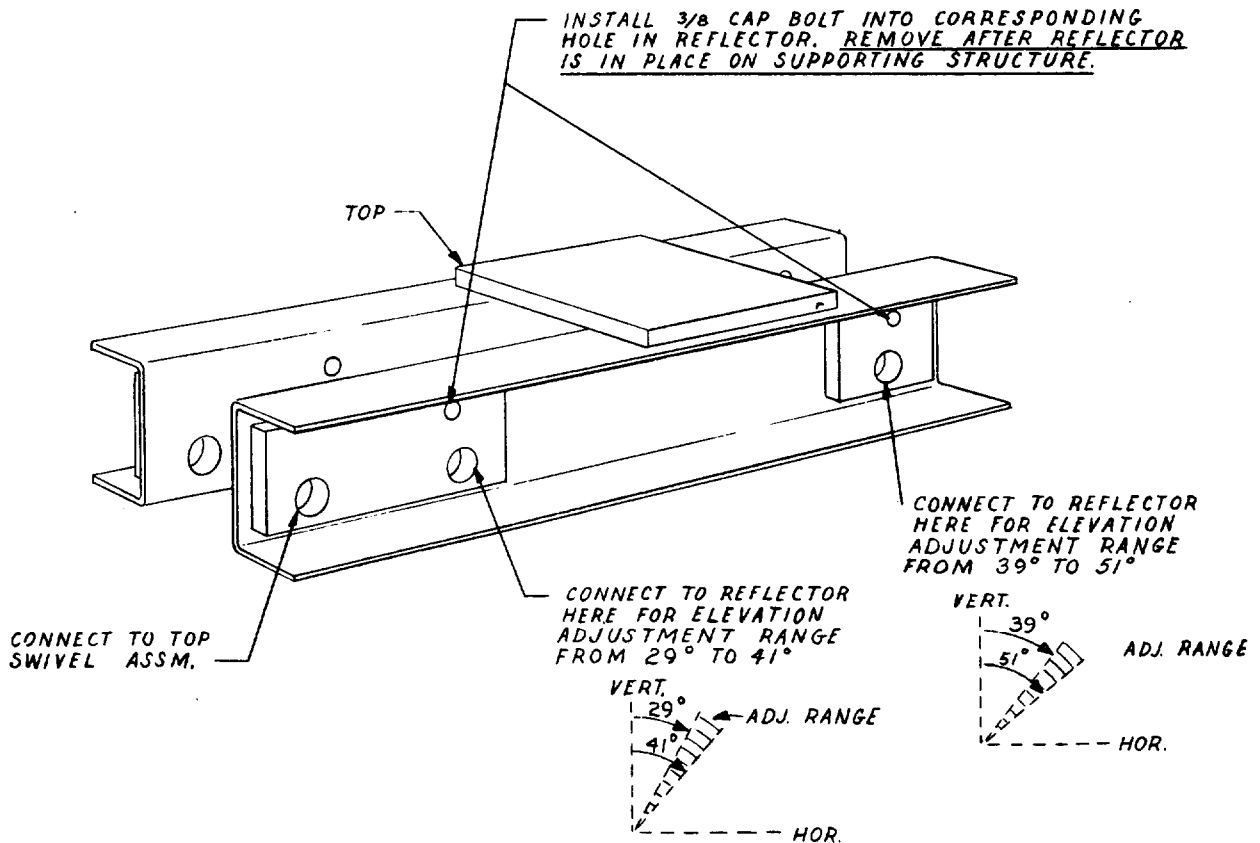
Top Mount Assembly - KS-16320 Passive Reflector
